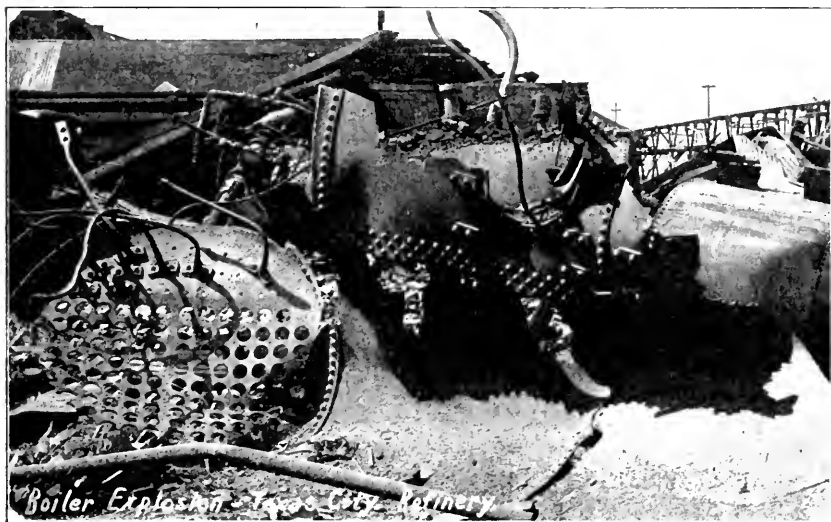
EXPLODED BOILER, TEXAS CITY.
